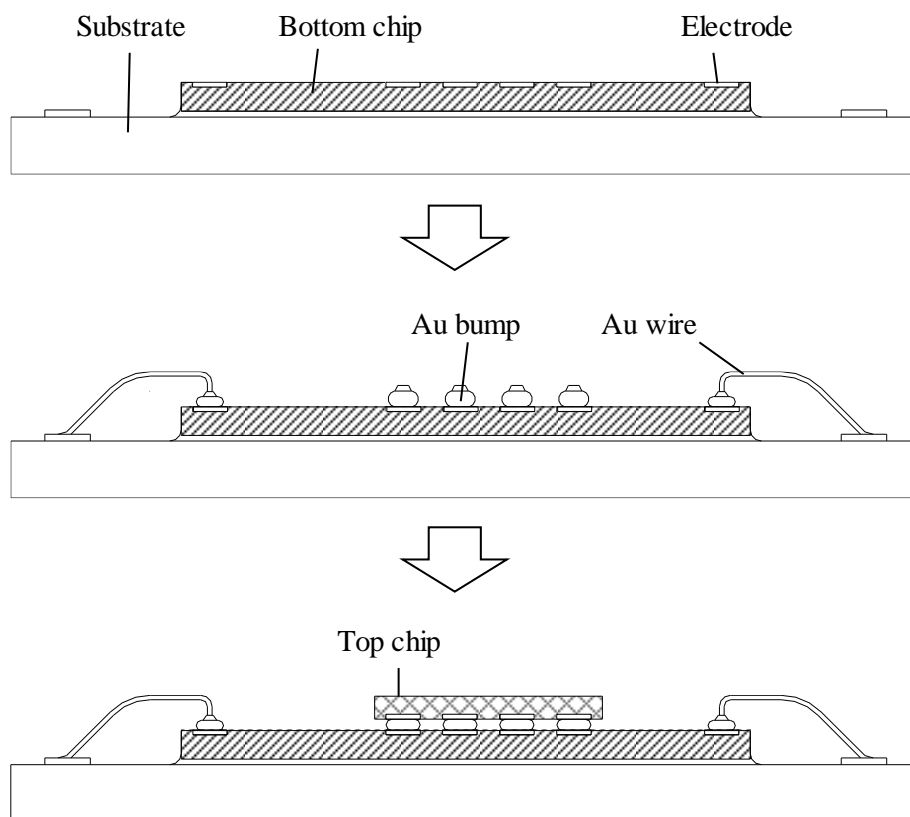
Assembly method of Chip on Chip bonding with pre-mount of bottom chip on substrate.
